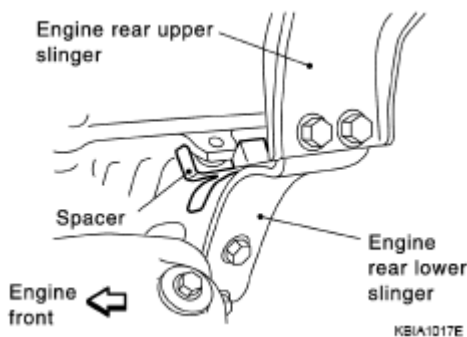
Inserting Spacer Between Cylinder Head And Engine Rear Lower Slinger
